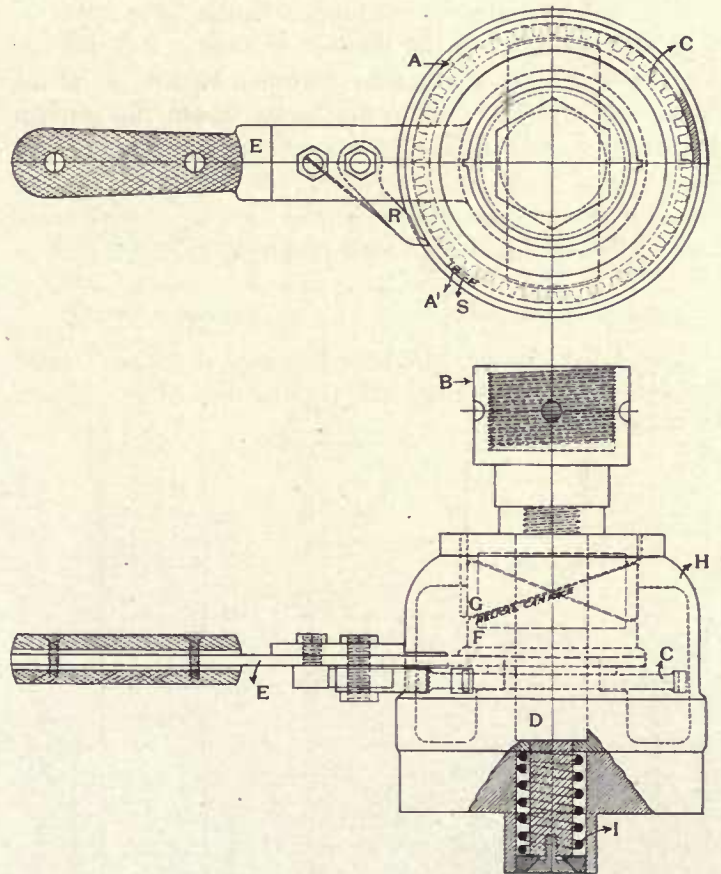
Chuck for Milling Grooves on Injector Water Nuts.
